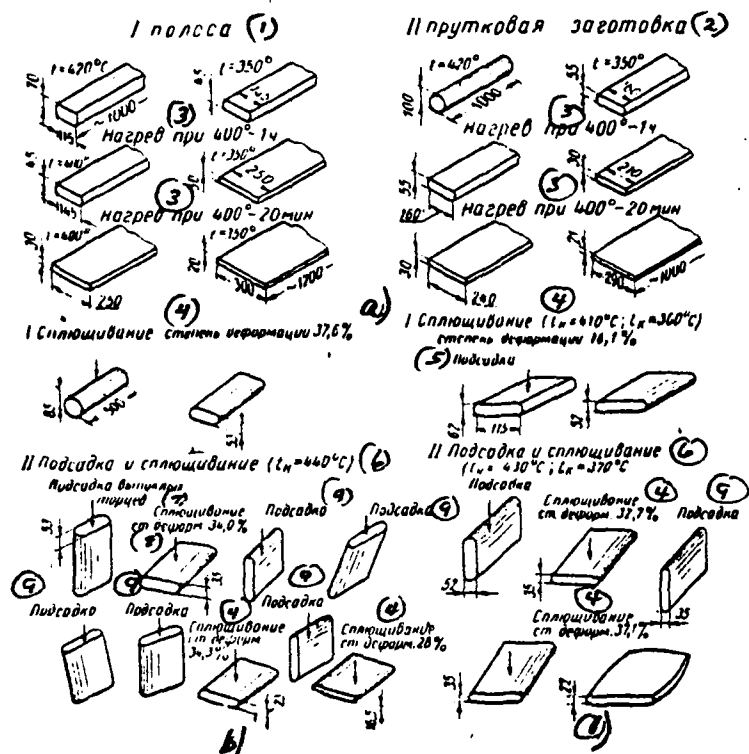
The diagrams of the free upsetting (forging) of the pressed bands and rods on the press 5000 T: a) upsetting of bands and bar blanks; b) forging rod about 85 mm (temperature it began $t_{\text{begin}} = 390^{\circ}\text{C}$ and the end of forging $t_{\text{end}} = 350^{\circ}\text{C}$); c) forging the band with the sizes/dimensions 62x115 of mm.
